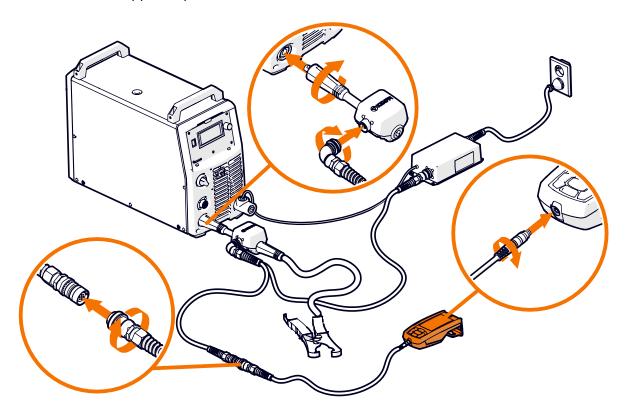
Connecting ARC Universal Adapter CV and Smart Reader to a welding machine
